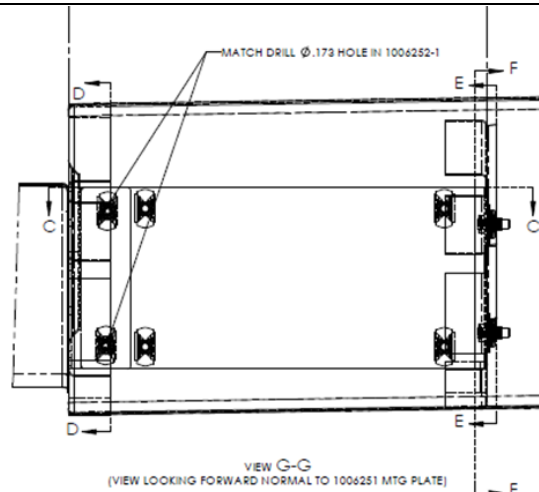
ROLL SERVO ANGLE TO MOUNTING PLATE ATTACHMENT
